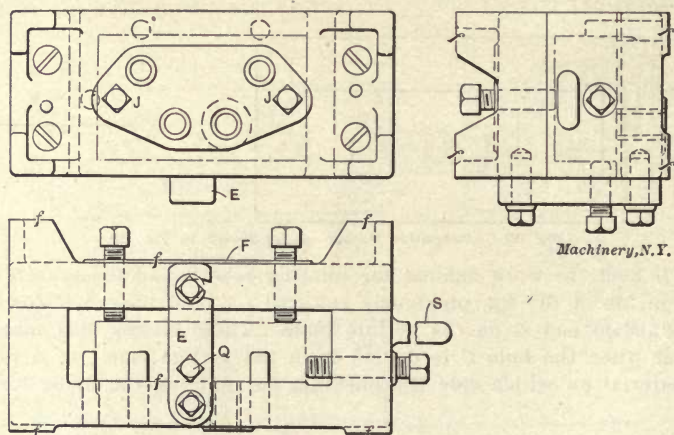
Jig Improved by adding Feet opposite Faces containing Drill Bushings
